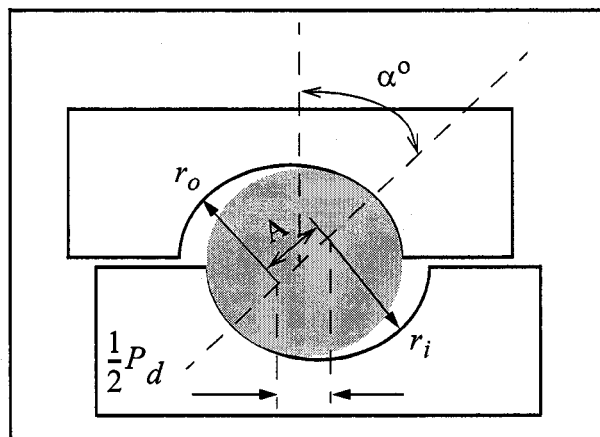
Radial ball bearing showing ball-raceway contact due to axial shift of inner and outer rings.
